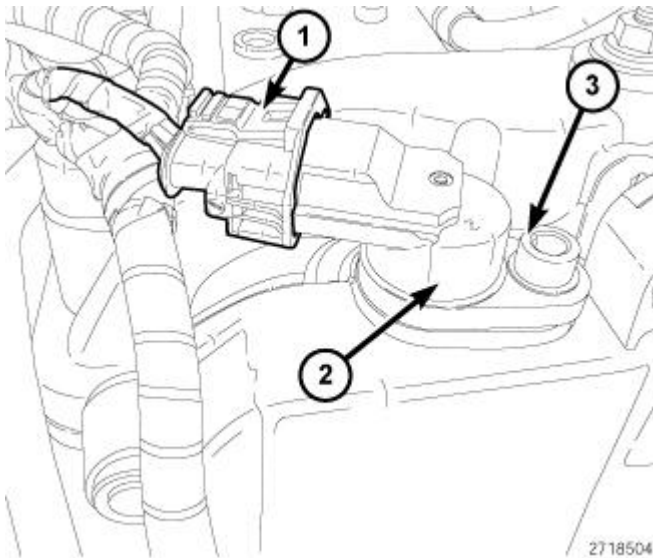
Camshaft Position Sensor Harness Connector, Sensor & Bolt
